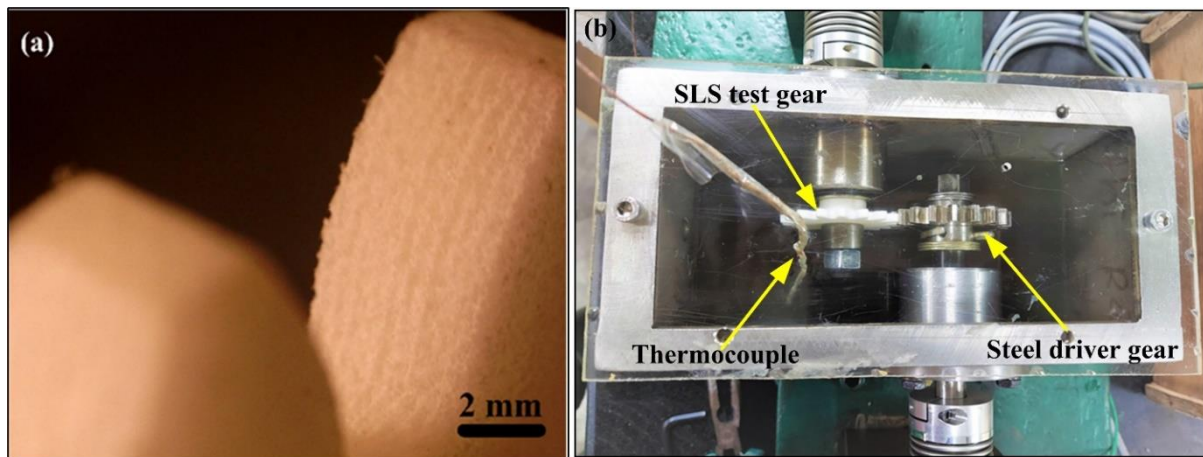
(a) SLS gear tooth surface and (b) Close-up view of steel-SLS gear mesh
